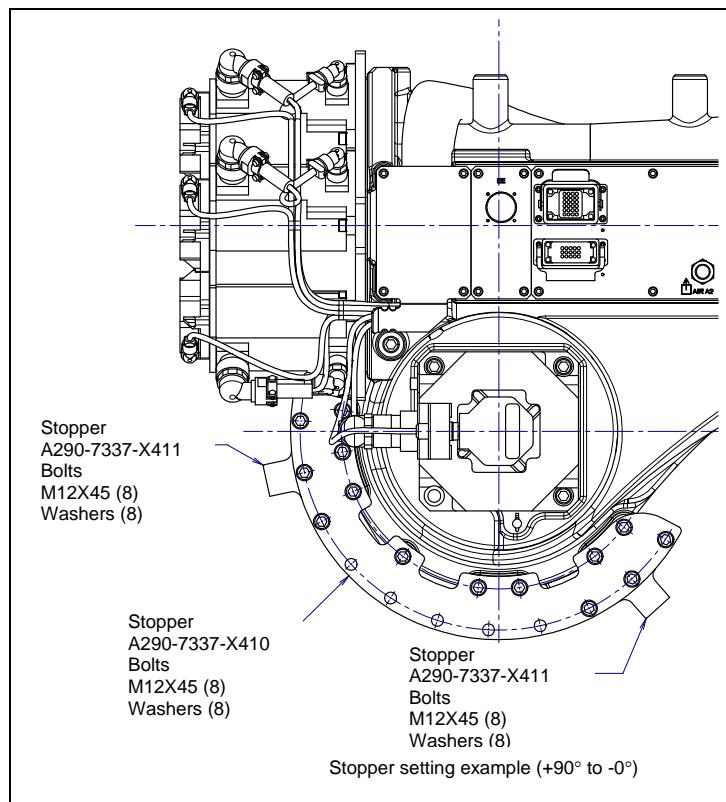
(u) Mounting the J3-axis adjustable mechanical stopper (1/2)
